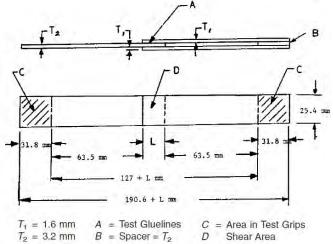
Form and dimensions of Shear Strength of single-lap-joint test specimens [11]
